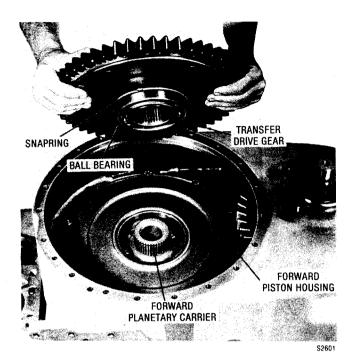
Installing transfer drive gear assembly (TT, TTB)
